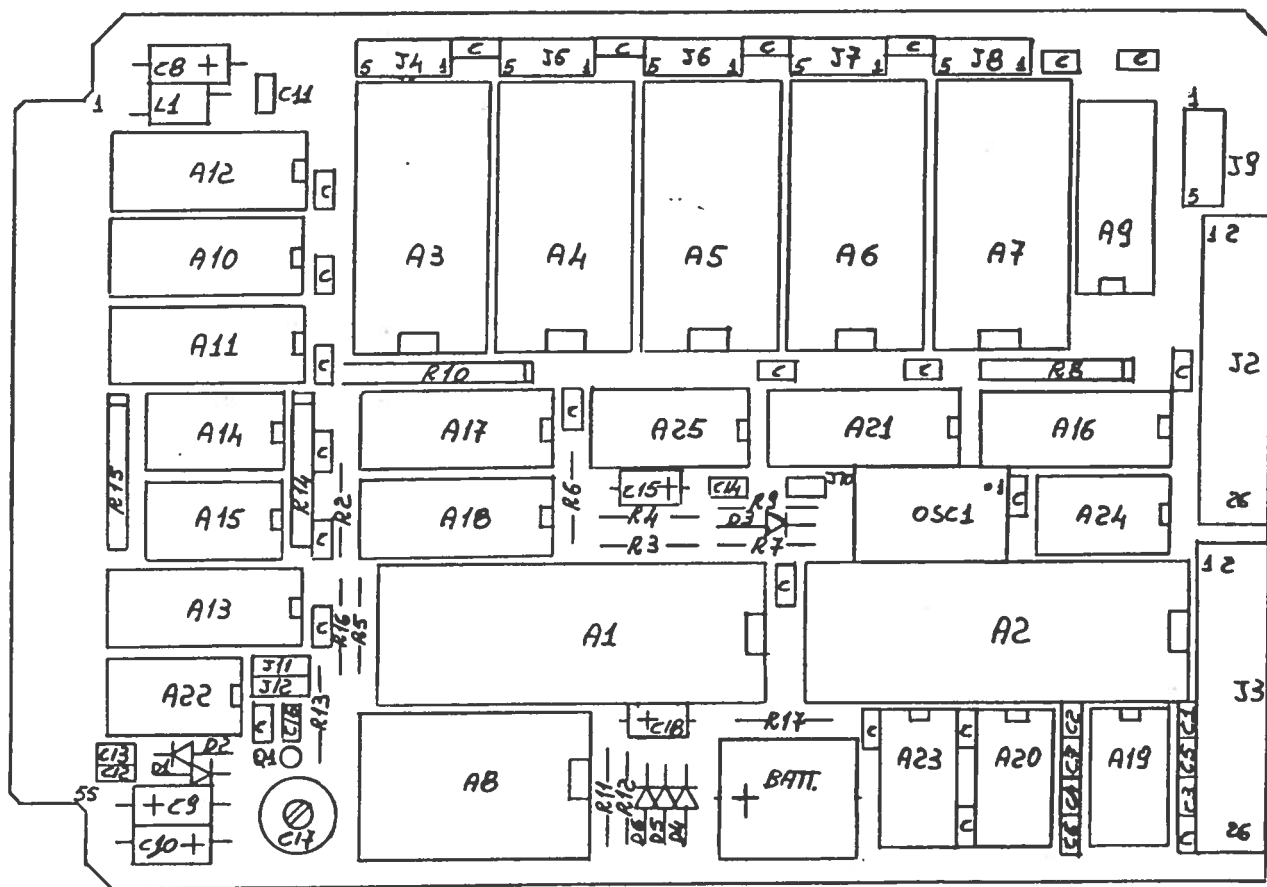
COMPONENTS AND JUMPERS CONNECTORS LAYOUT OF CPU BOARD.
